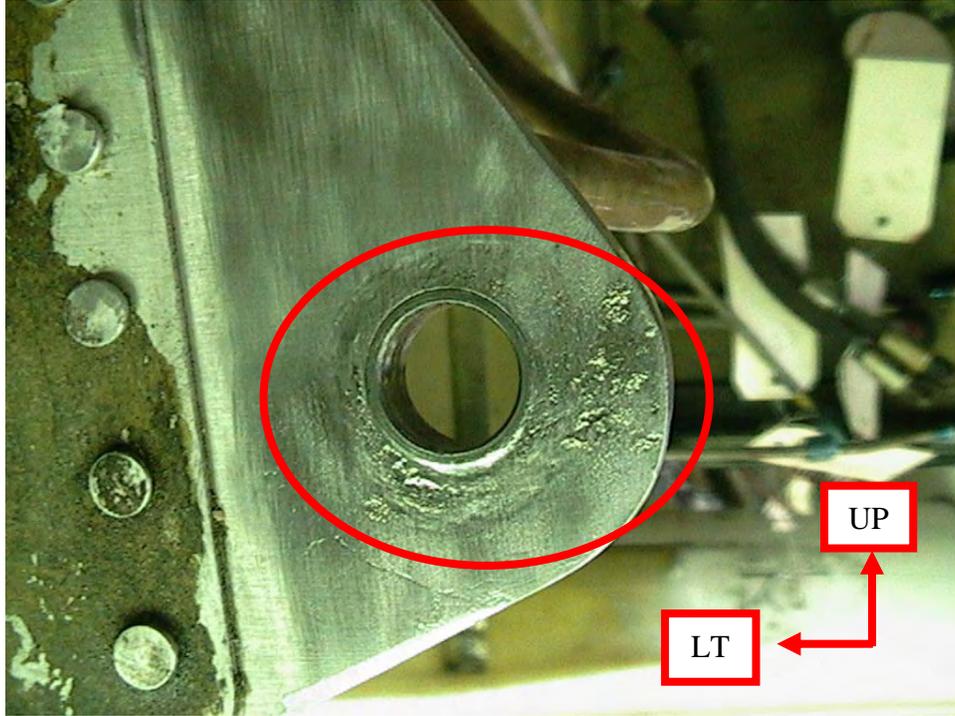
Corrosion on the Left Wing Rear Spar Wing Side Attachment Point WS 30
